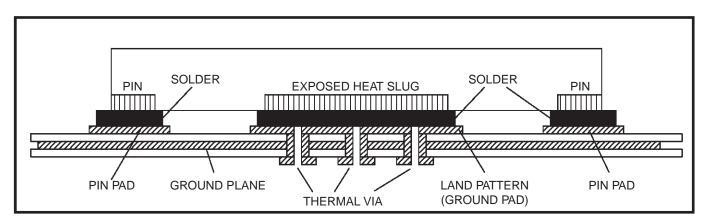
P.C. Assembly for Exposed Pad Thermal Release Path - Side View (drawing not to scale)
